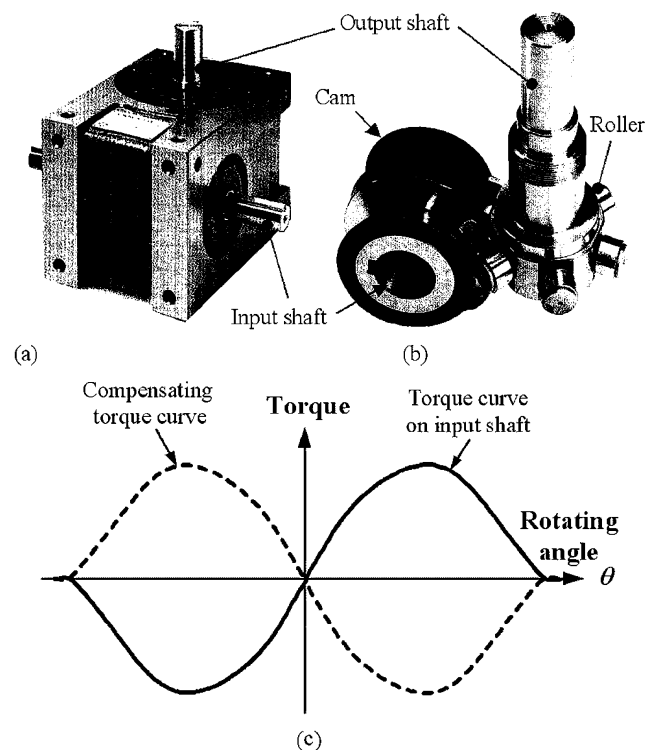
Roller gear cam indexing device and torque variation on input shaft. (a) Roller gear cam indexing device. (b) Roller gear and cam.
